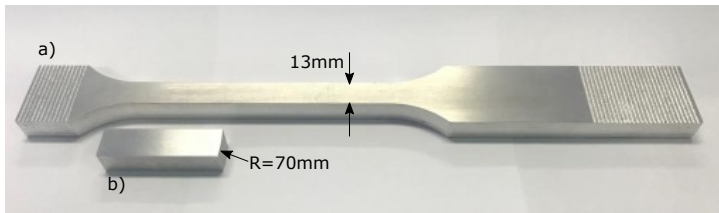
The dog-bone specimen (a), and fretting pad (b) used for fretting fatigue tests.
